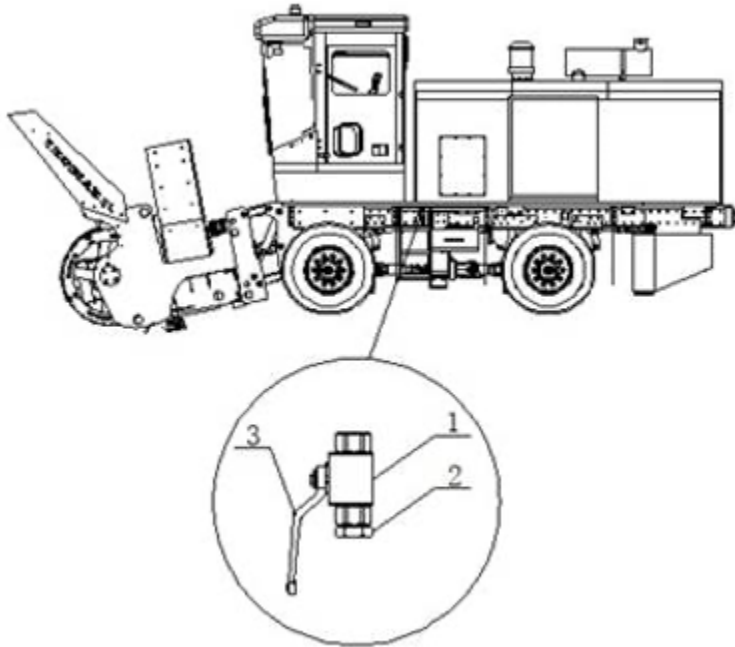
position of hydraulic oil drain ball valve
